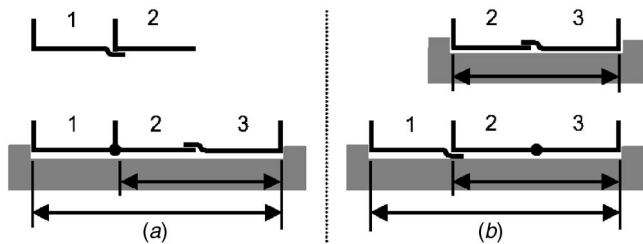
Assembly sequences where two dimensions are adjusted (a) at one step and (b) independently at two steps (modified from Ref. [2])
